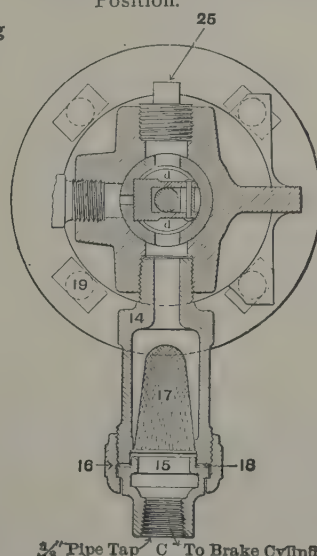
Horizontal Section Through High Speed Reducing Valve.
